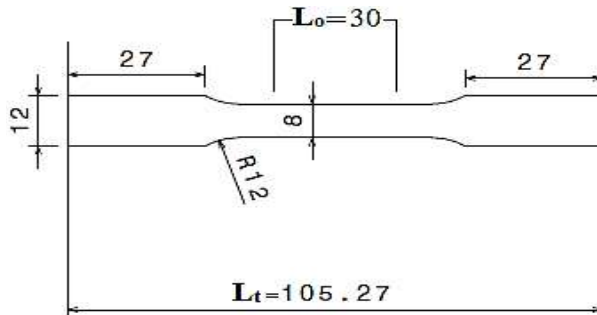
The exact geometrical dimensions of the Type E sample in mm (6).
